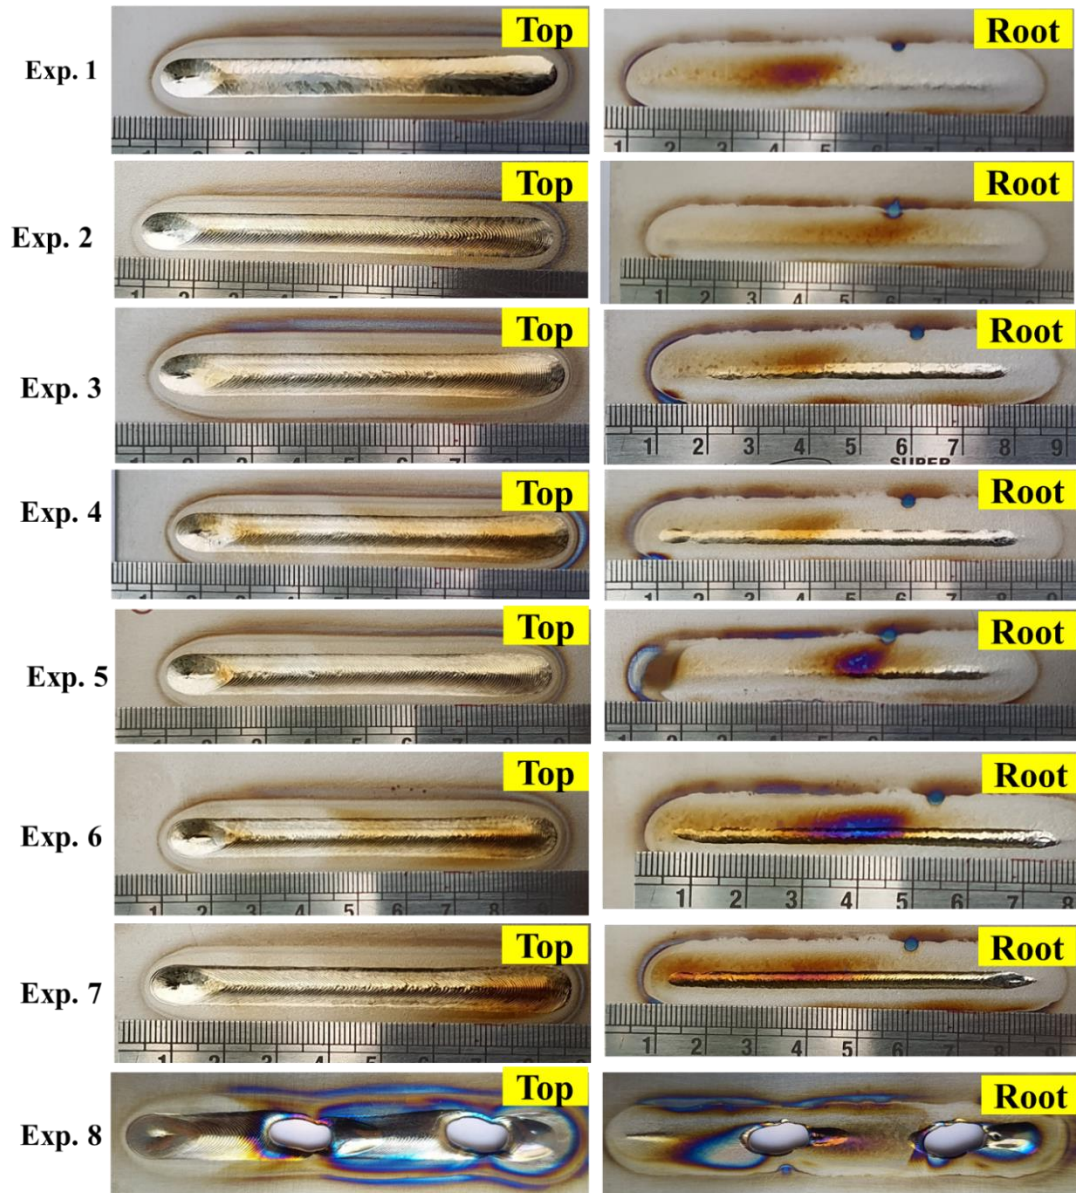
Weld bead appearance at different set of pulse parameters
